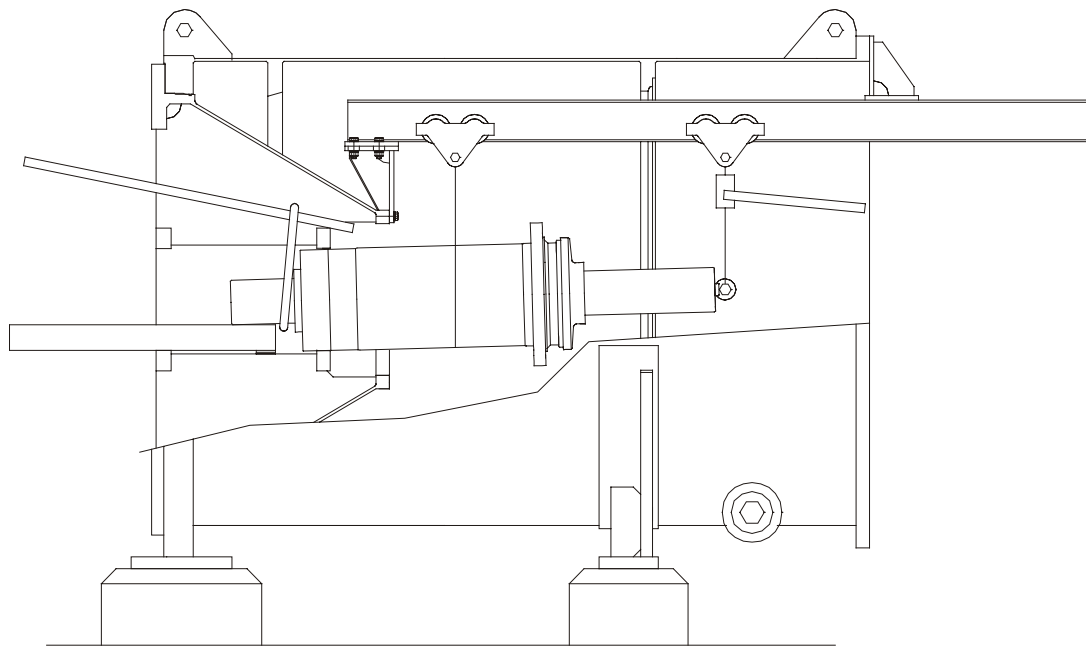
Steps for removing the bearing assembly (STOA009389, STOA008711)
